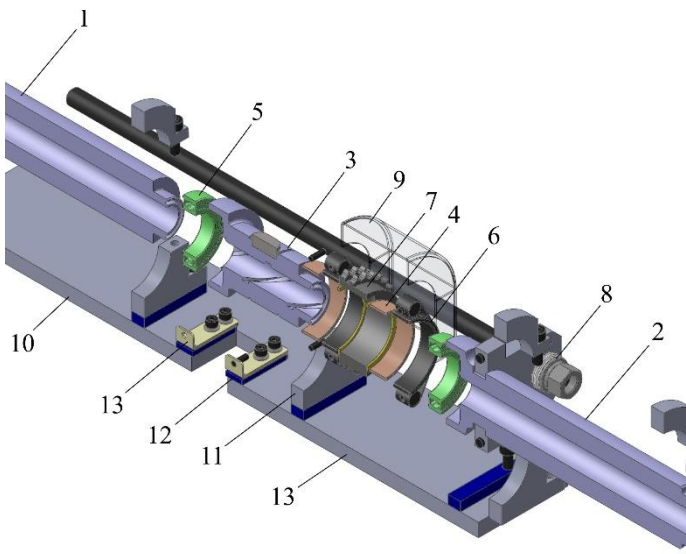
Conceptual model No 3. Longitudinal section – exploded view: 1 – initial sleeve, 2 – final sleeve, 3 – rotational barrel segment, 4 – bearing bushes, 5 – bearings, 6 – band heating elements, 7 – toothed wheel, 8 – fixing screw, 9 – casing, 10 – supporting plate, 11 – mounting of the barrel, 12 – insulator, 13 – mounting of the heating element
